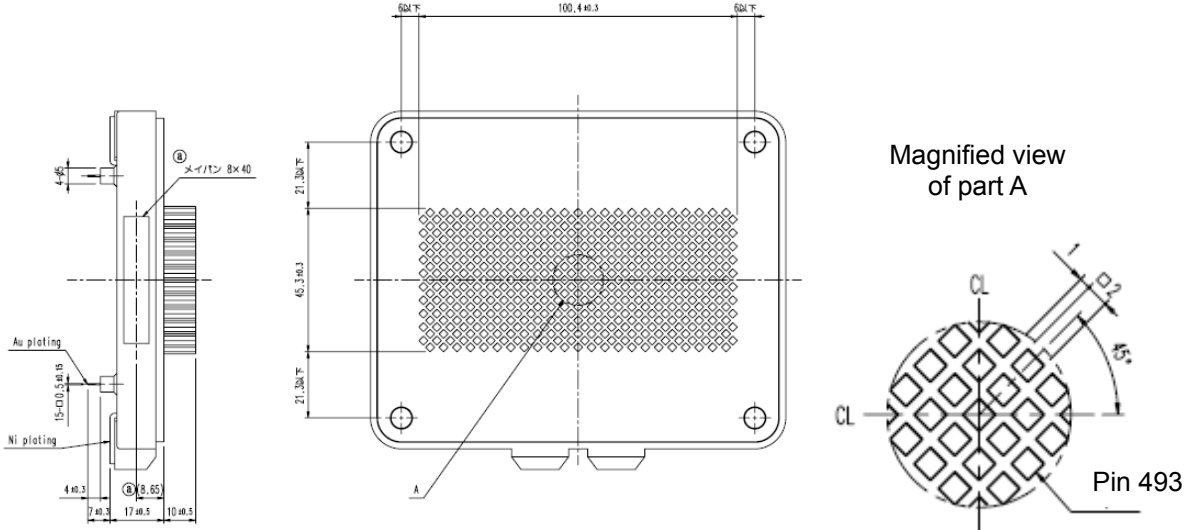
is the outline drawing of the module with pin-fin baseplate. The fin base is made of a nickel (Ni)-plated copper (Cu) material. Please make sure not to damage the nickel plating, pin-fins and surface of the base plate when mounting the module. Especially scratches on the base surface might cause a liquid leakage.
